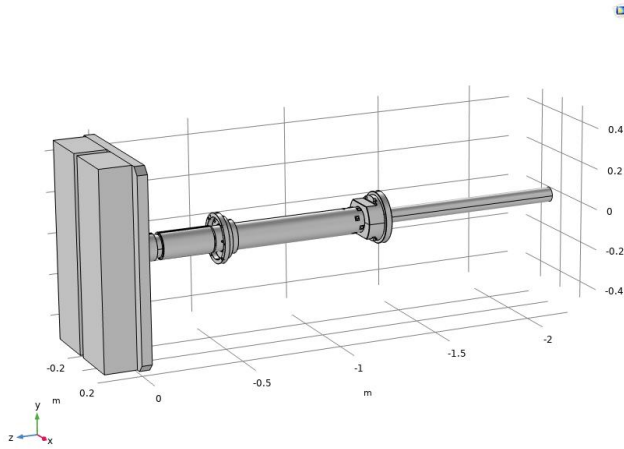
Core Support Shaft 3D Model Of Index Core Rotation Type Double Injection
